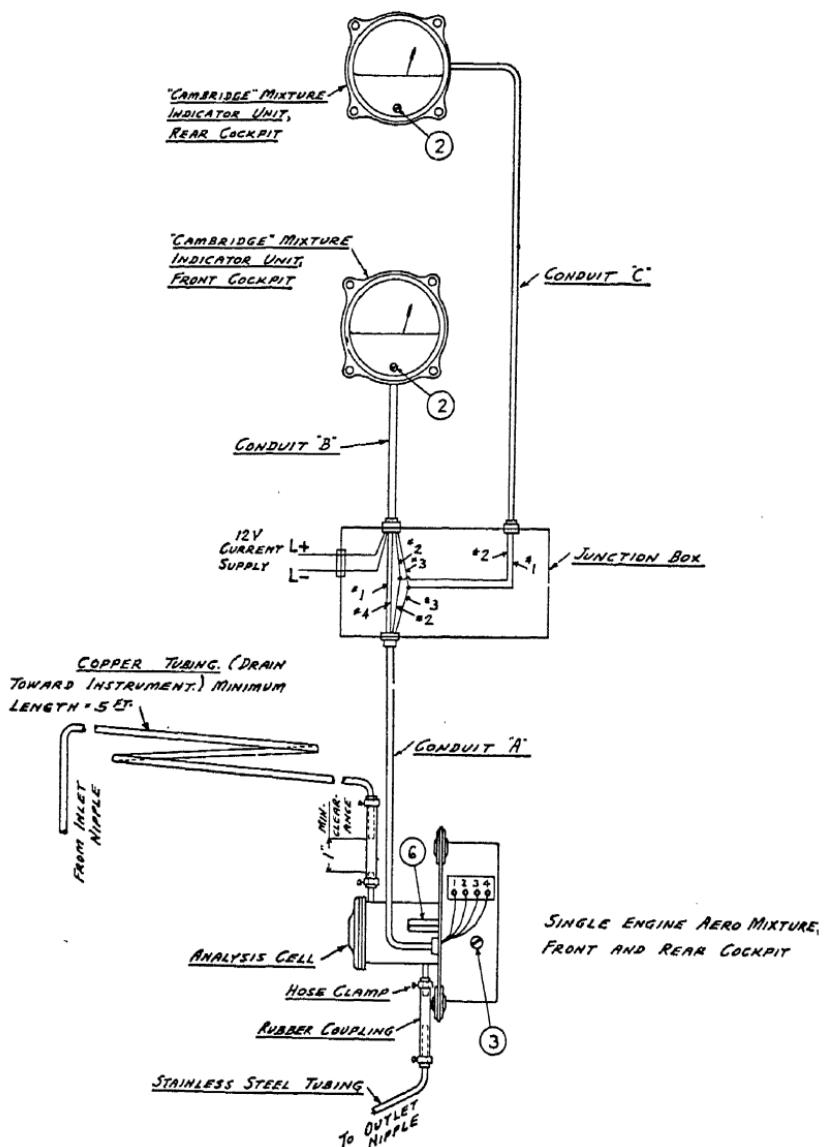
Single Engine Aero Mixture, Front and Rear Cockpit
